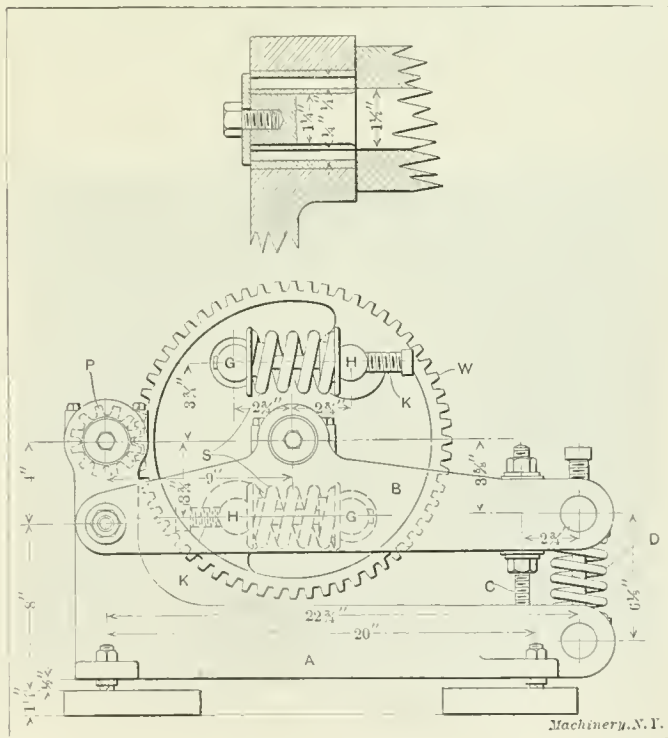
View of Gear Testing Machine showing Pivoted Frame and Spring for Measuring Thrust
